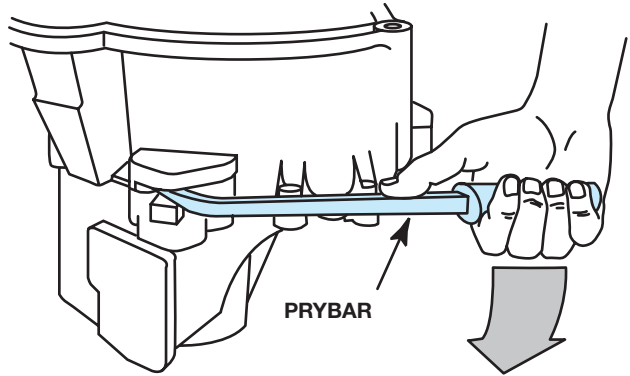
Most transaxles use formed-in-place gaskets that tend to glue the case and covers together. This unit has a slot to allow prying without damaging the gasket surfaces.
